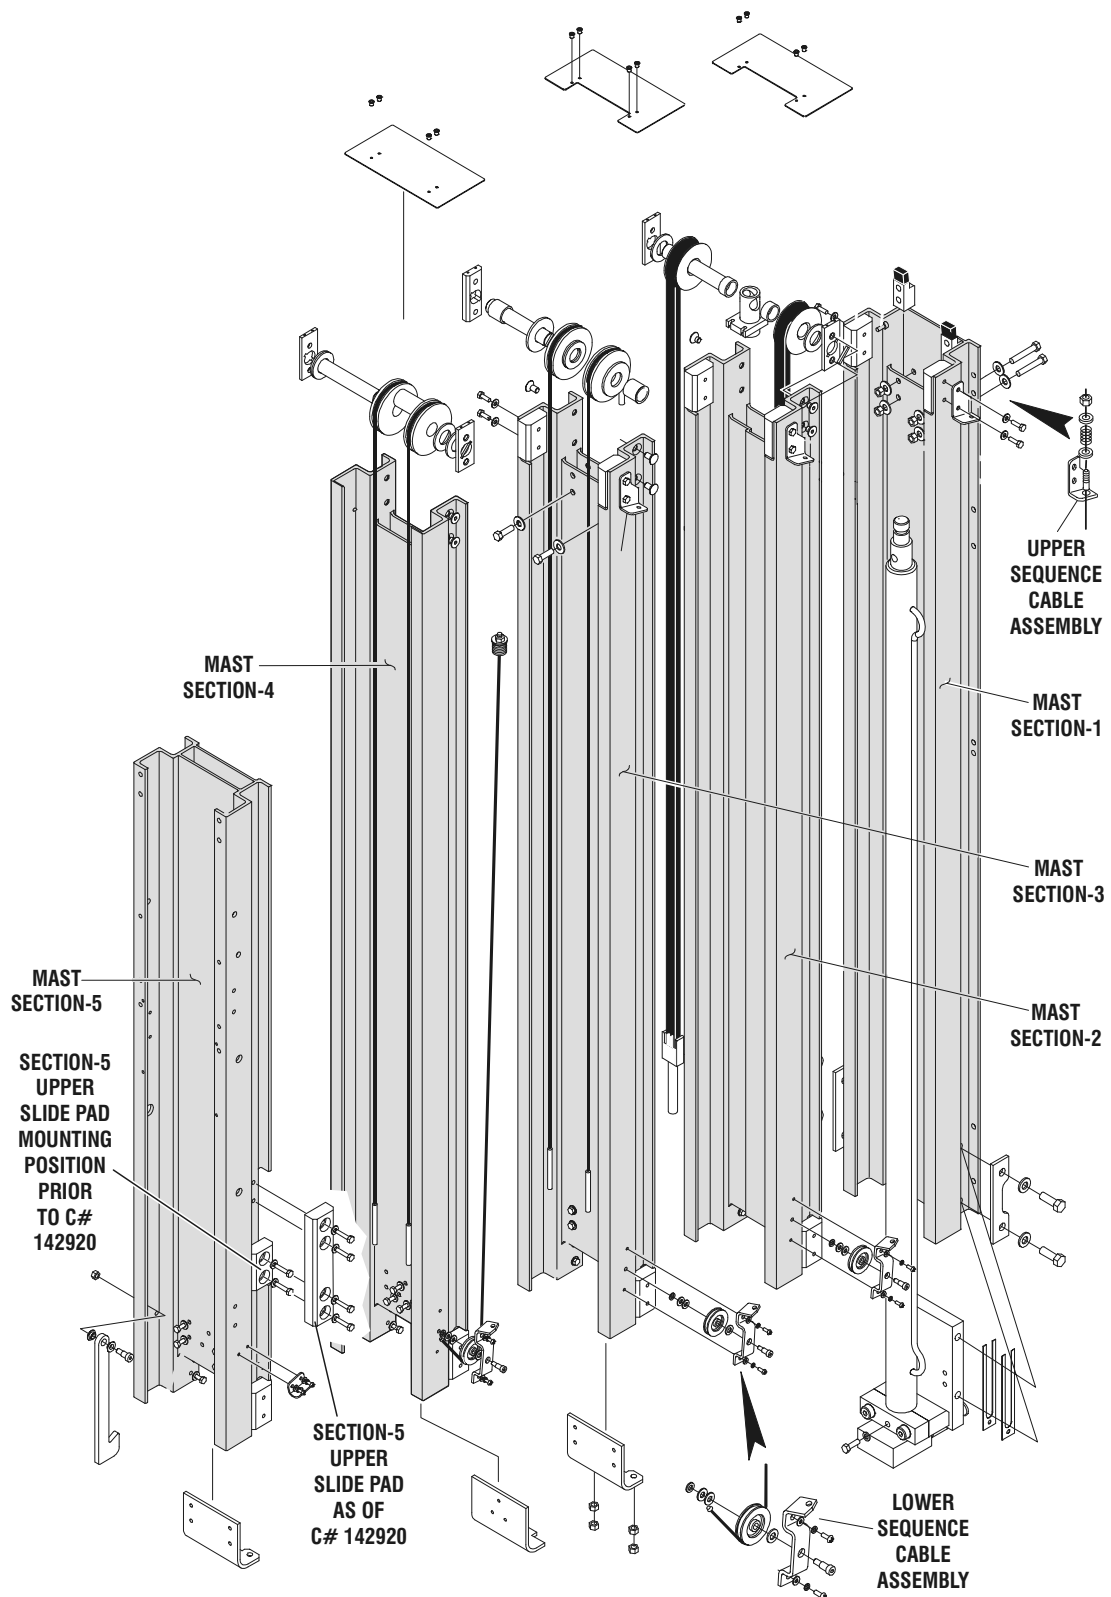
20EL Mast Assembly Components. (5 - Section)
